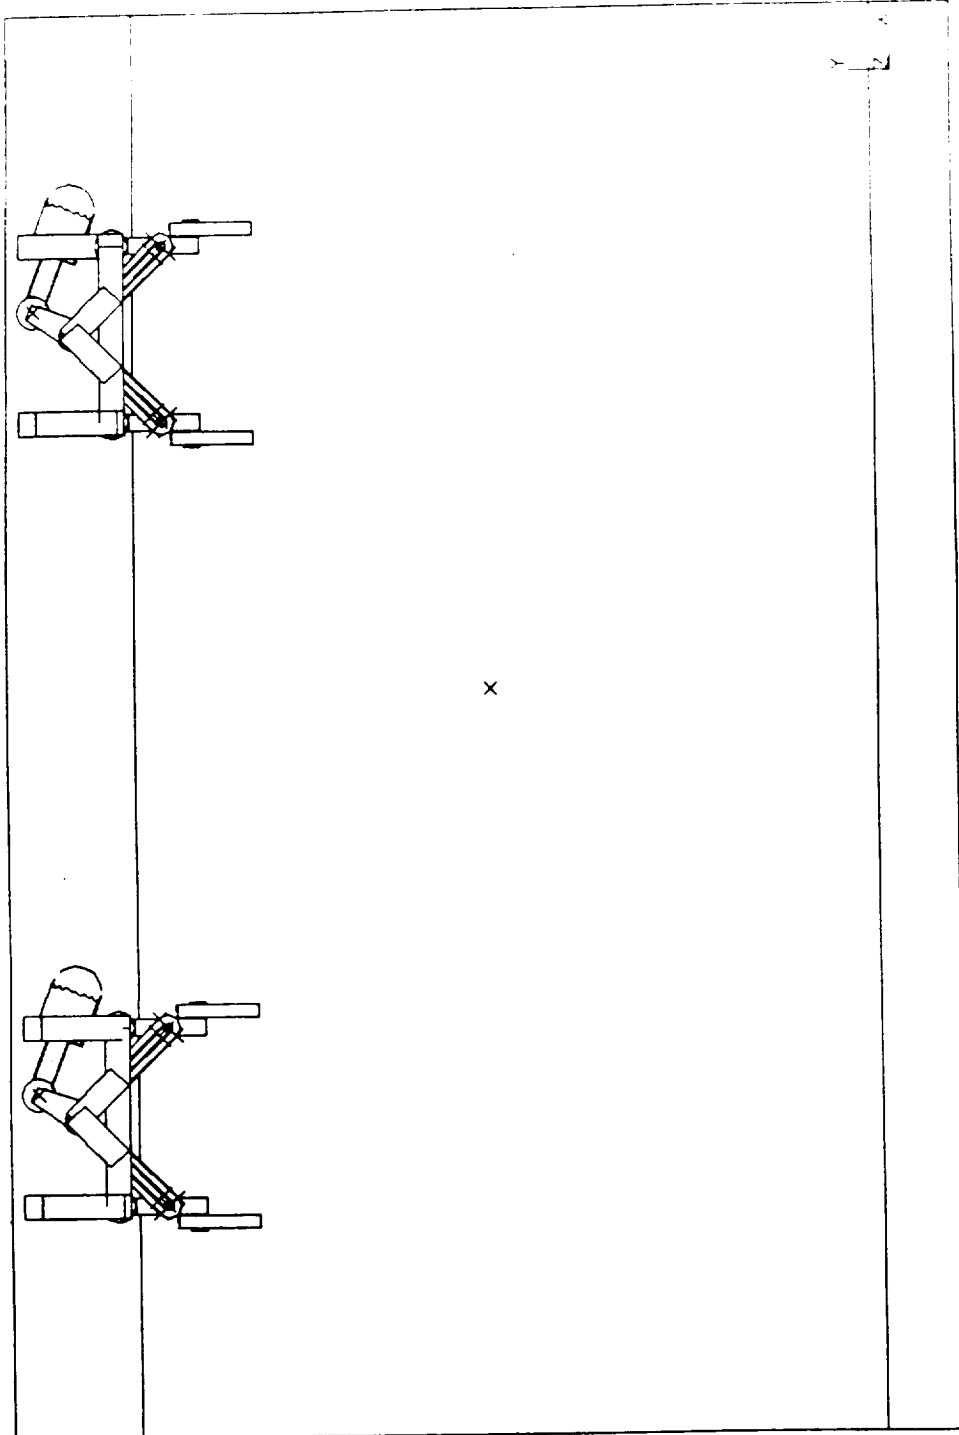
System Layout of Gryphon/Eclipse Attach Mechanism (Side View)
